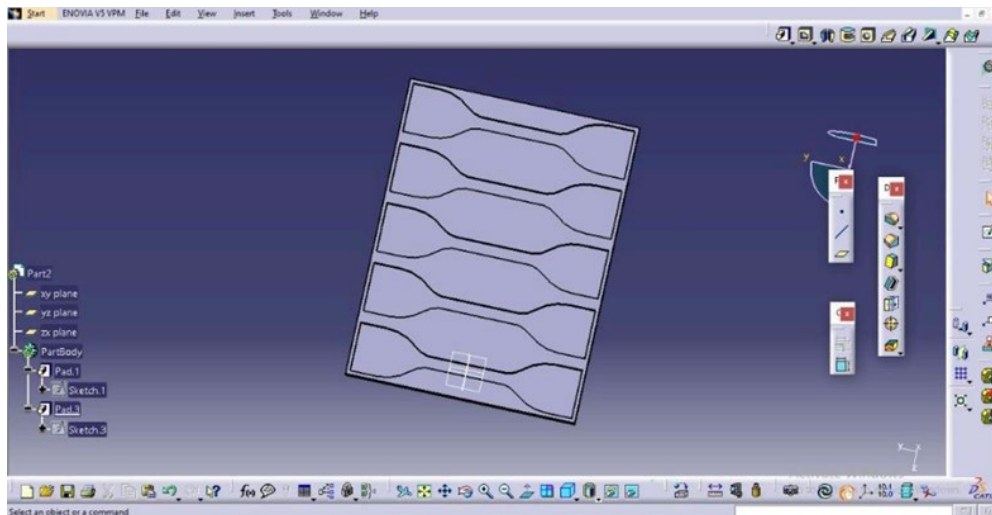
The CATIA drawing of standard ASTM D412 mold
